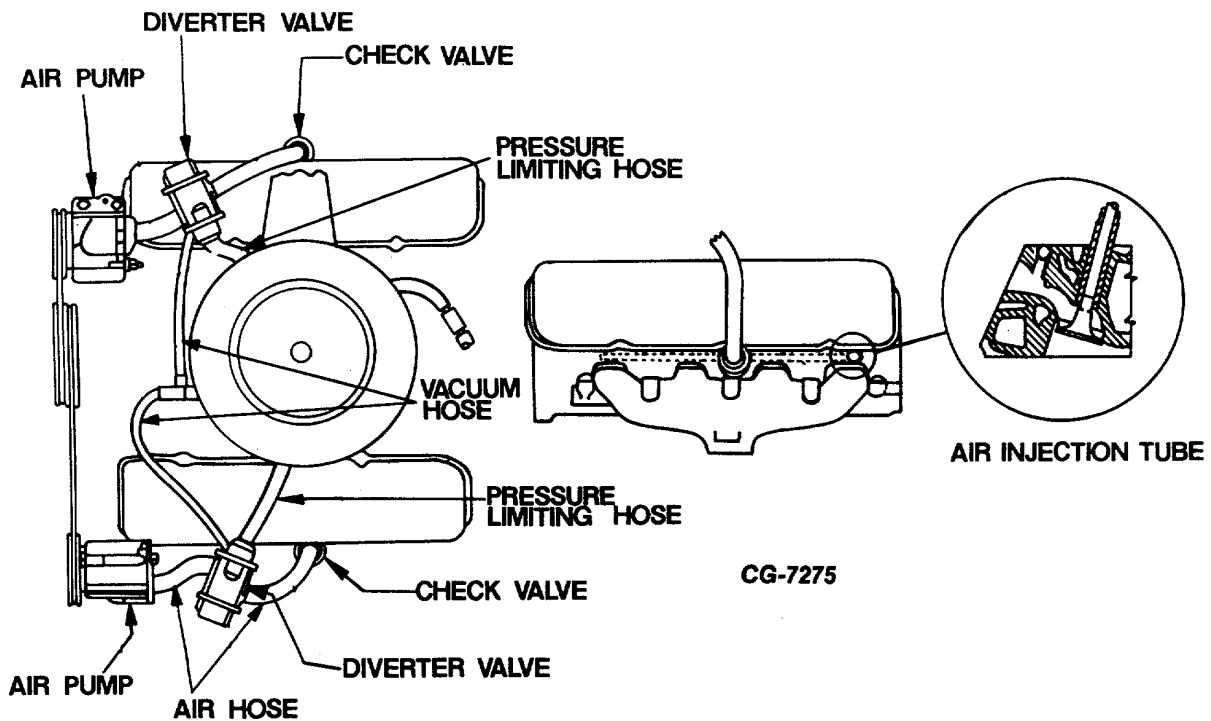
Air Injection System Used on MV404; 446 Engines (For California)
